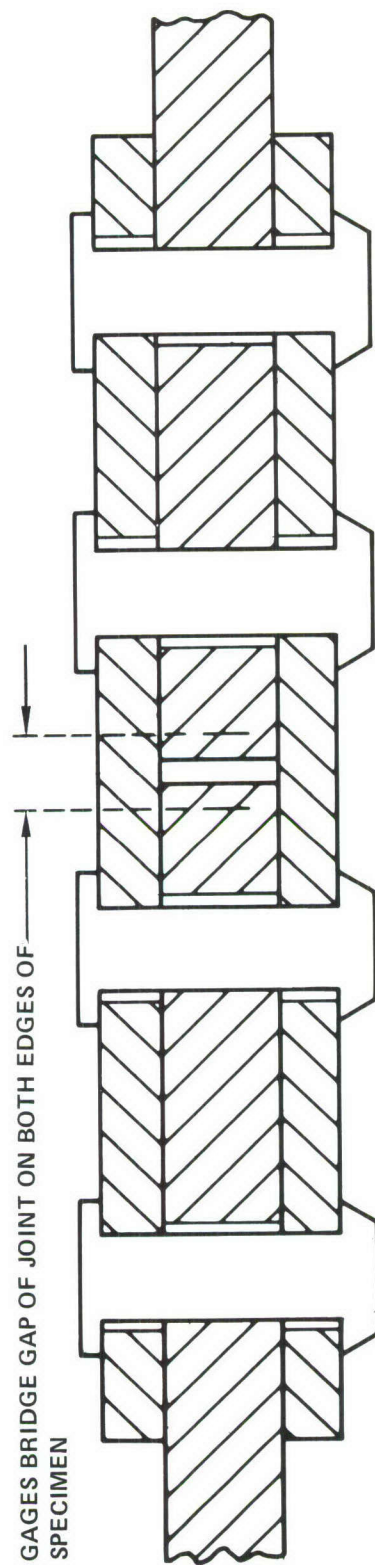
Side Sectional View of Precompressed Joint Prior to Tension Test
